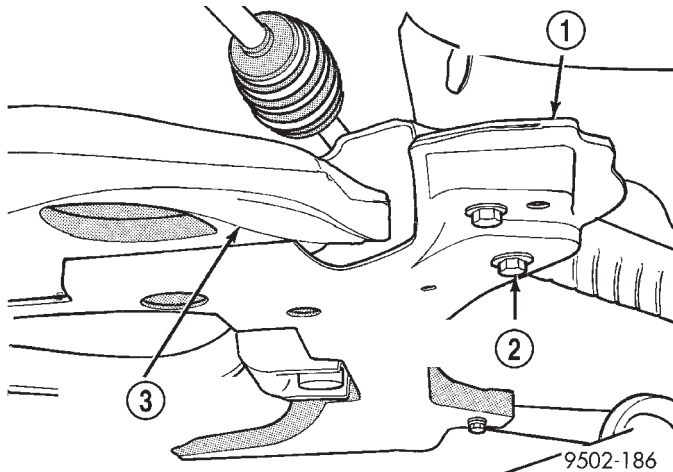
Lower Control Arm Attachment To Front Suspension Crossmember
